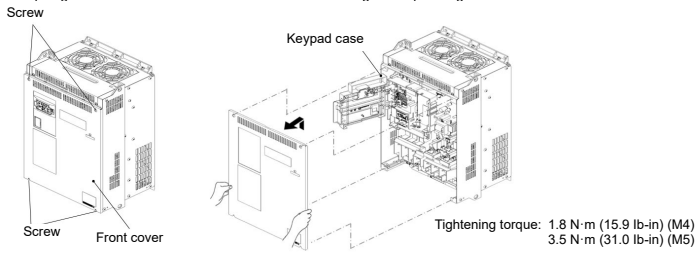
Removal of the front cover (for VF1A-G139AS4)
